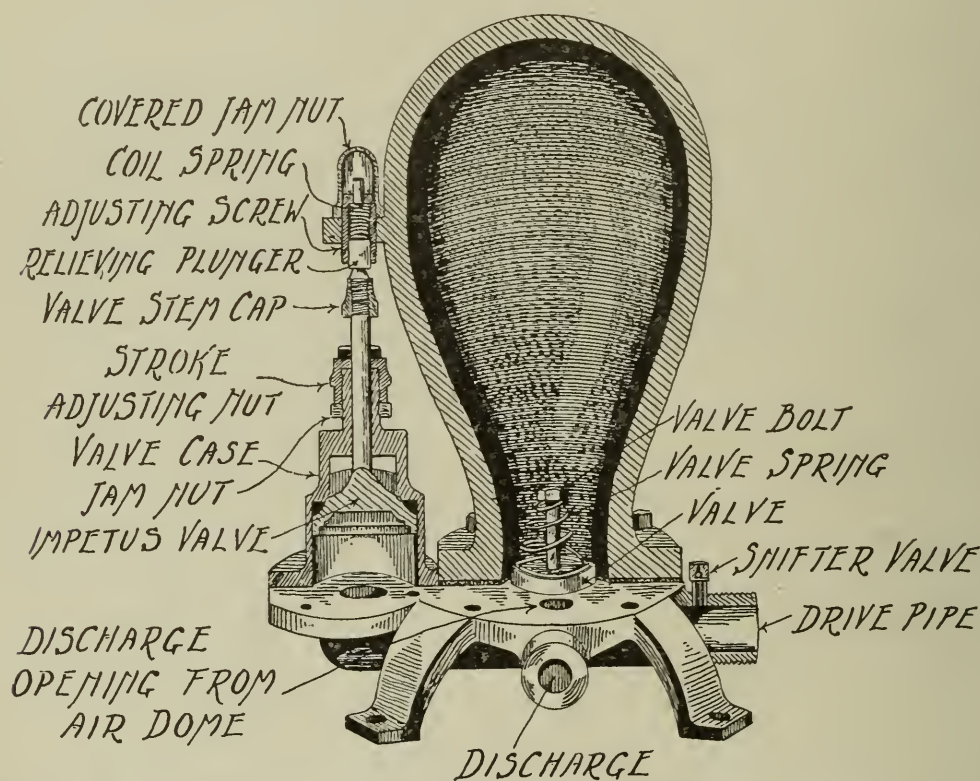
(b) Section of hydraulic ram, showing parts.
